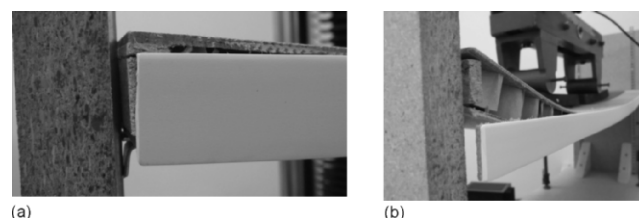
Failure modes in edge banded honeycomb shelves during testing (a) direct coating and (b) stabilizer edge techniques.
